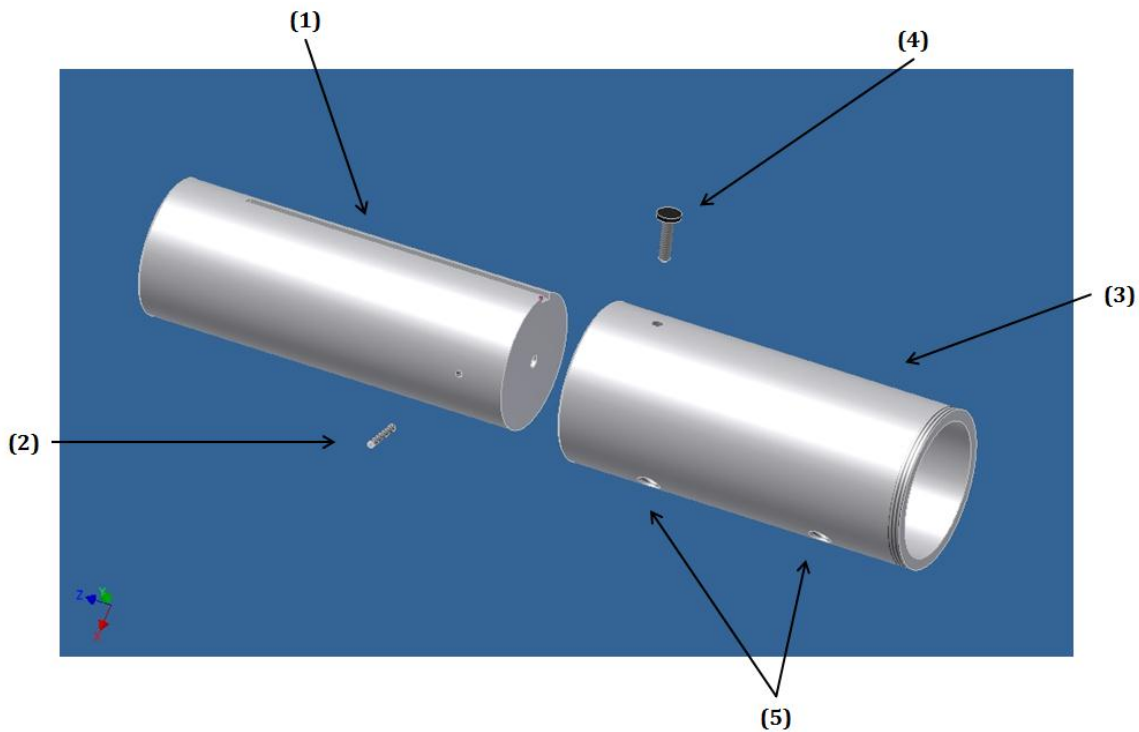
Exploded view of adjustable illumination optic consisting of the inner cylinder (1), small set screw (2), outer cylinder (3), large set screw (4), and 1/4-20" tapped holes (5).
